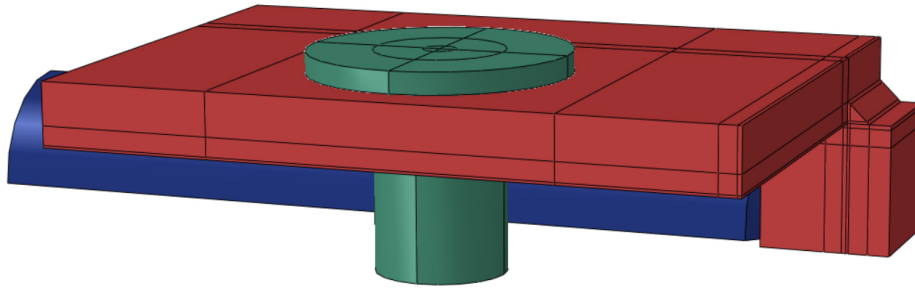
Assembly with all the parts for the test specimen with transverse fillet welds
